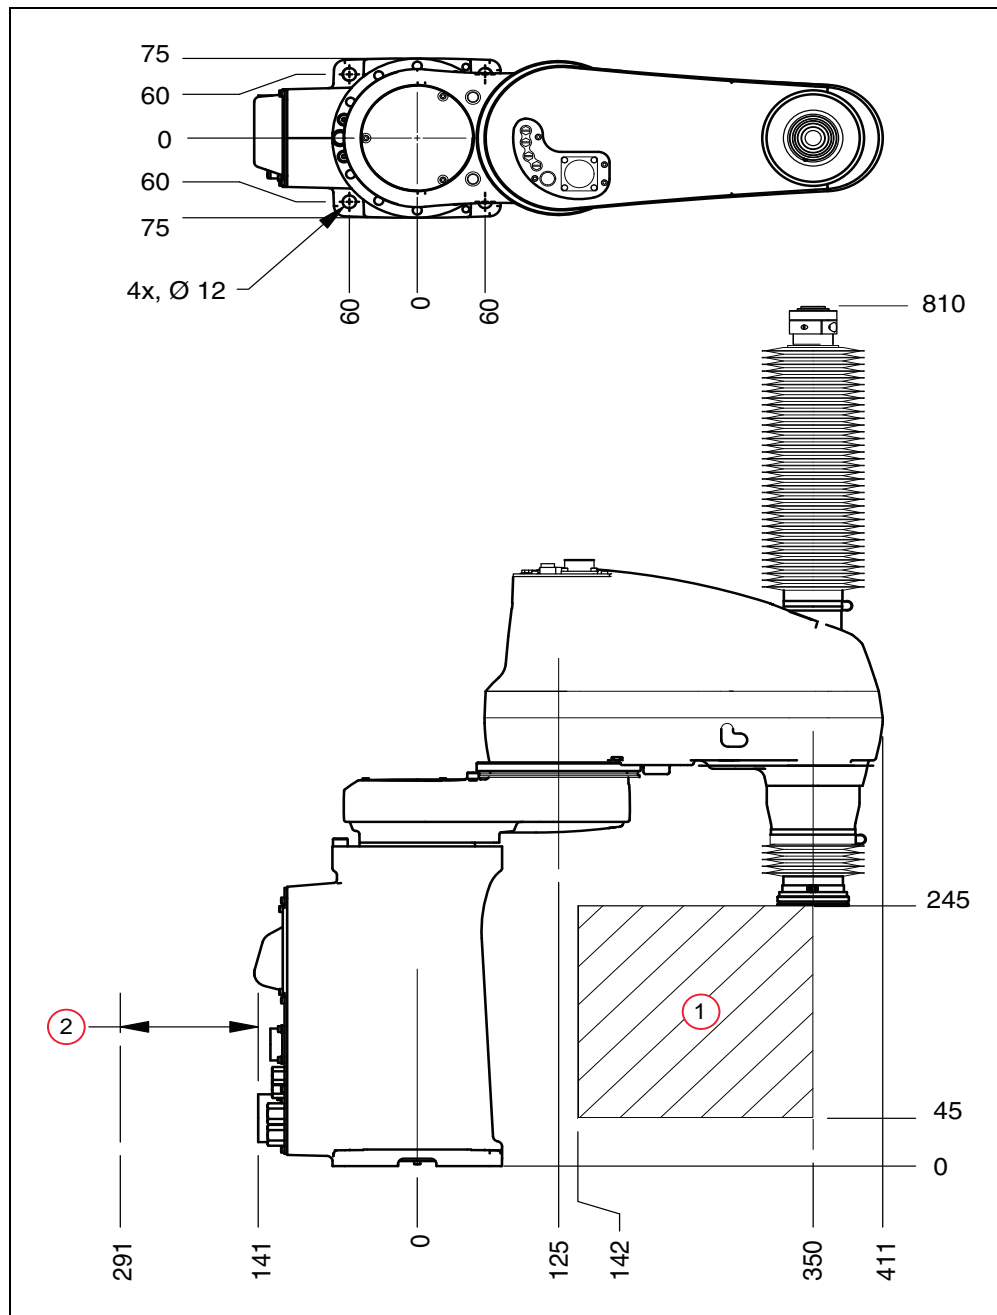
Cobra 350 CR / ESD Top and Side Dimensions (Units in mm)
